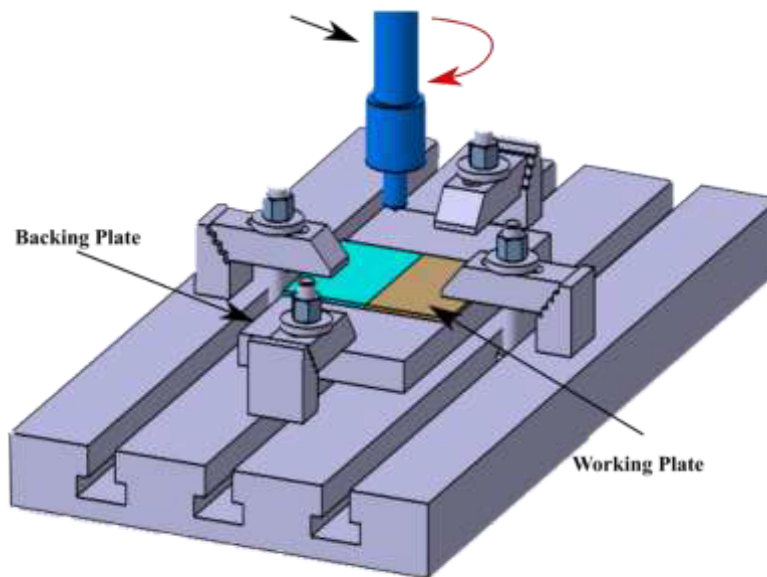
Schematic drawing of FSW technique for welding 316 stainless steel to 4140 steel.
